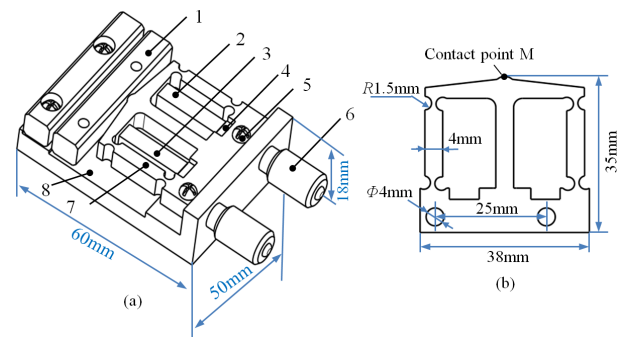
Structure of the proposed actuator: (a) overview: 1-linear slider, 2-PZT stack 1, 3-PZT stack 2, 4-wedge block, 5-screw, 6-micrometer knob, 7-umbrella-shaped flexure mechanism, 8-base; (b) size of the umbrella-shaped flexure mechanism.
